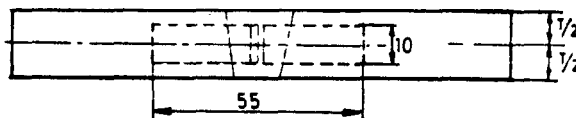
TENSILE TEST PIECE FOR SIZE 3.15 mm
